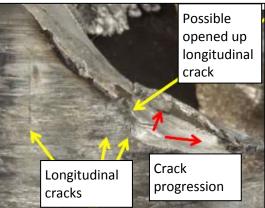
Origin of fatigue crack (2) from what appears to be one of the longitudinal cracks.
